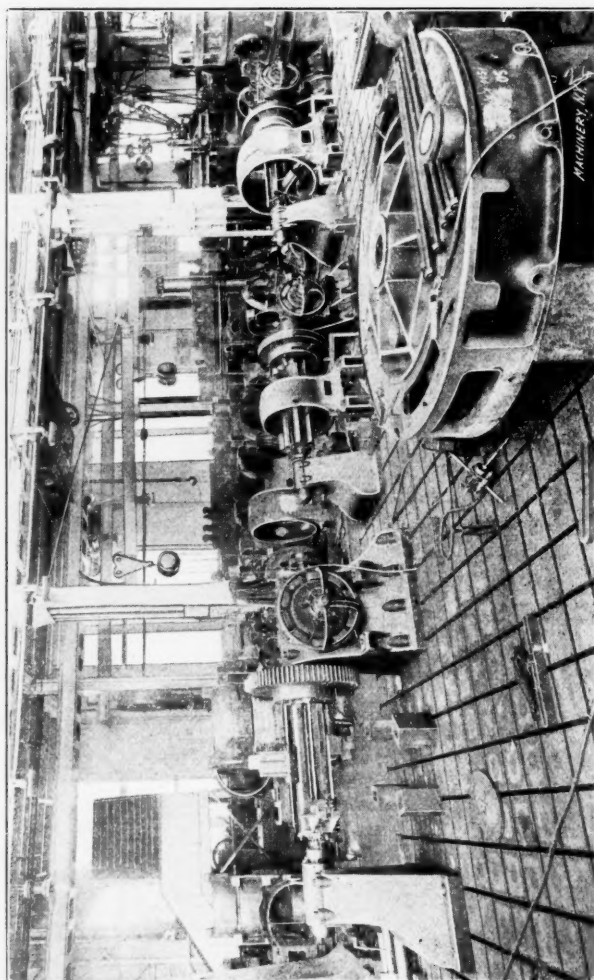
Boring Headstocks and Tailstocks, used with the Floorplate as a Foundation and Work Clamping Plates.
